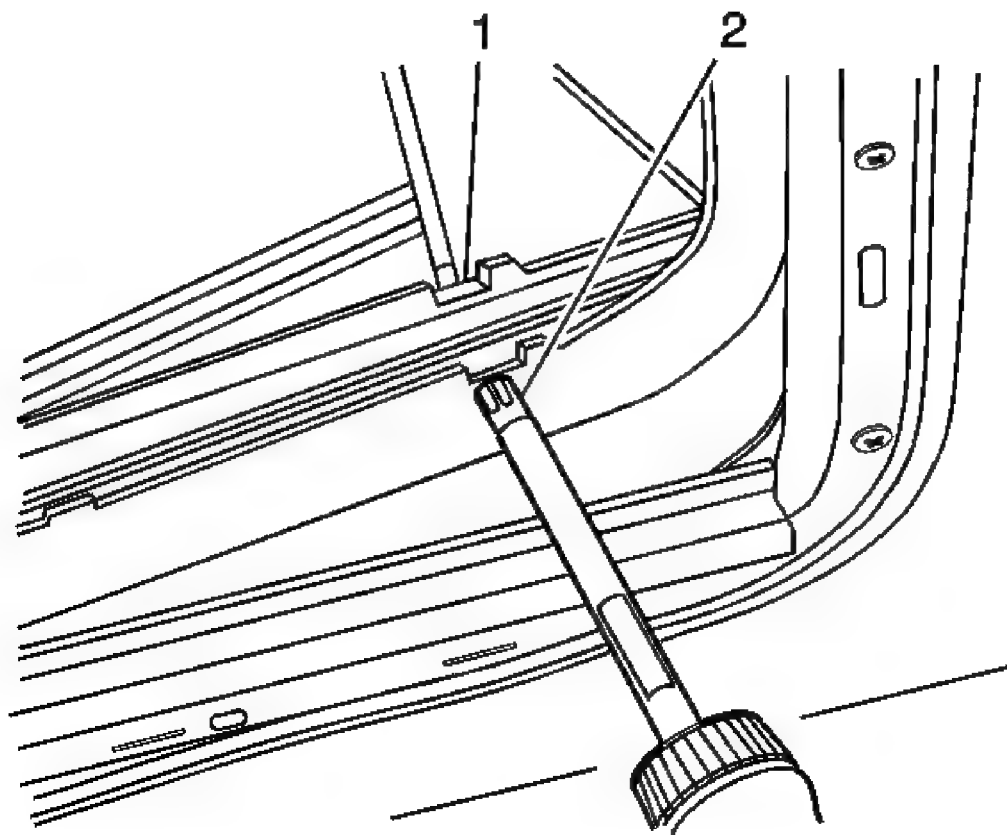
Locating Rear Screws Retaining Sunroof Window To Sunroof Slider Arm
